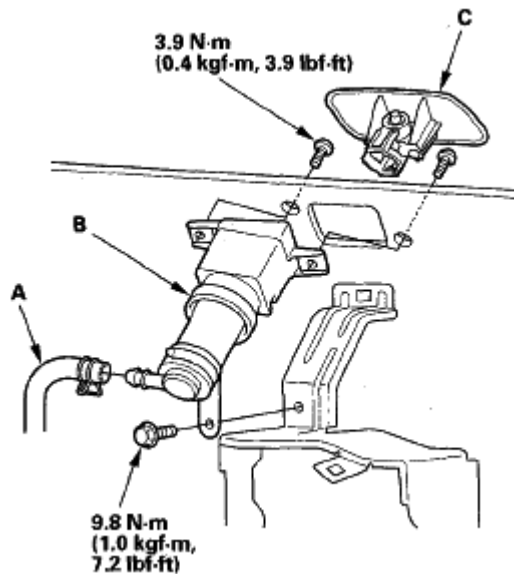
Identifying Headlight Washer Nozzle With Torque Specifications
